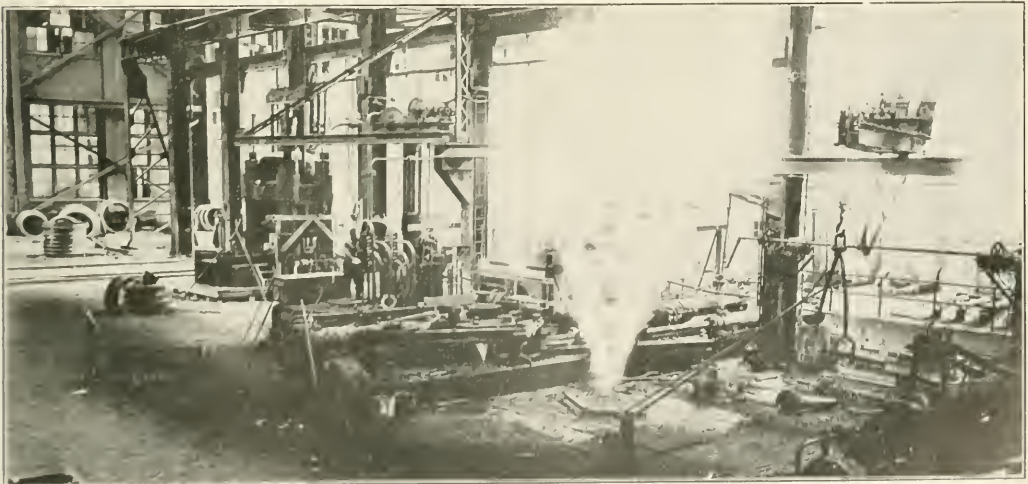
Special Rolling Mill, Driven by 1,000 Hp. Motor, on Which Wheels and Tires Are Made
